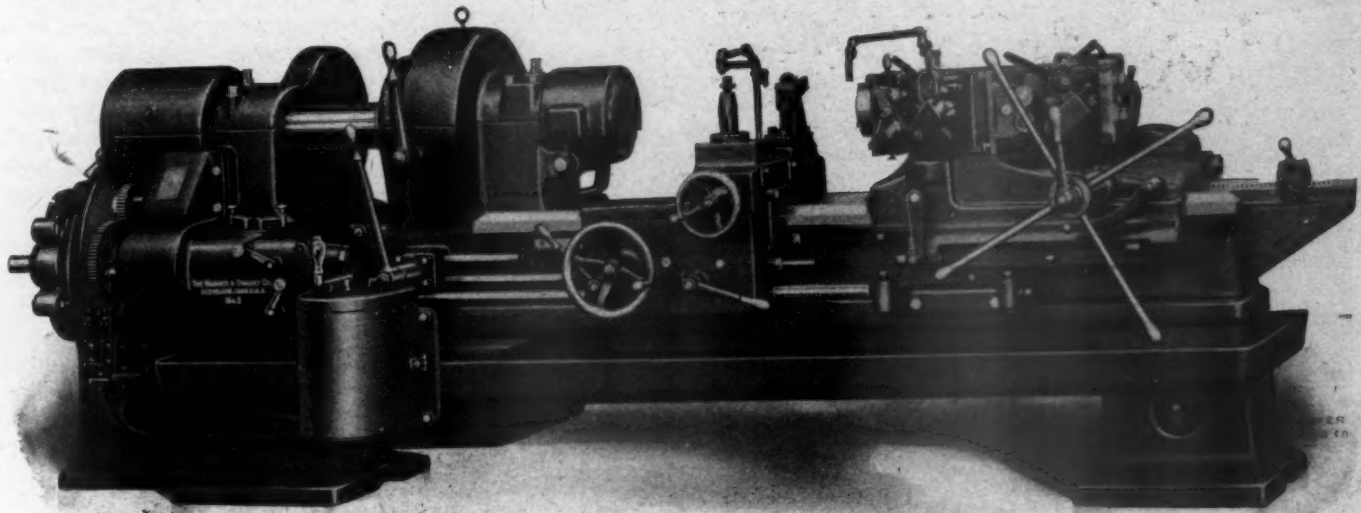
NO. 3 HOLLOW HEXAGON TURRET LATHE.—WARNER & SWASEY COMPANY.
